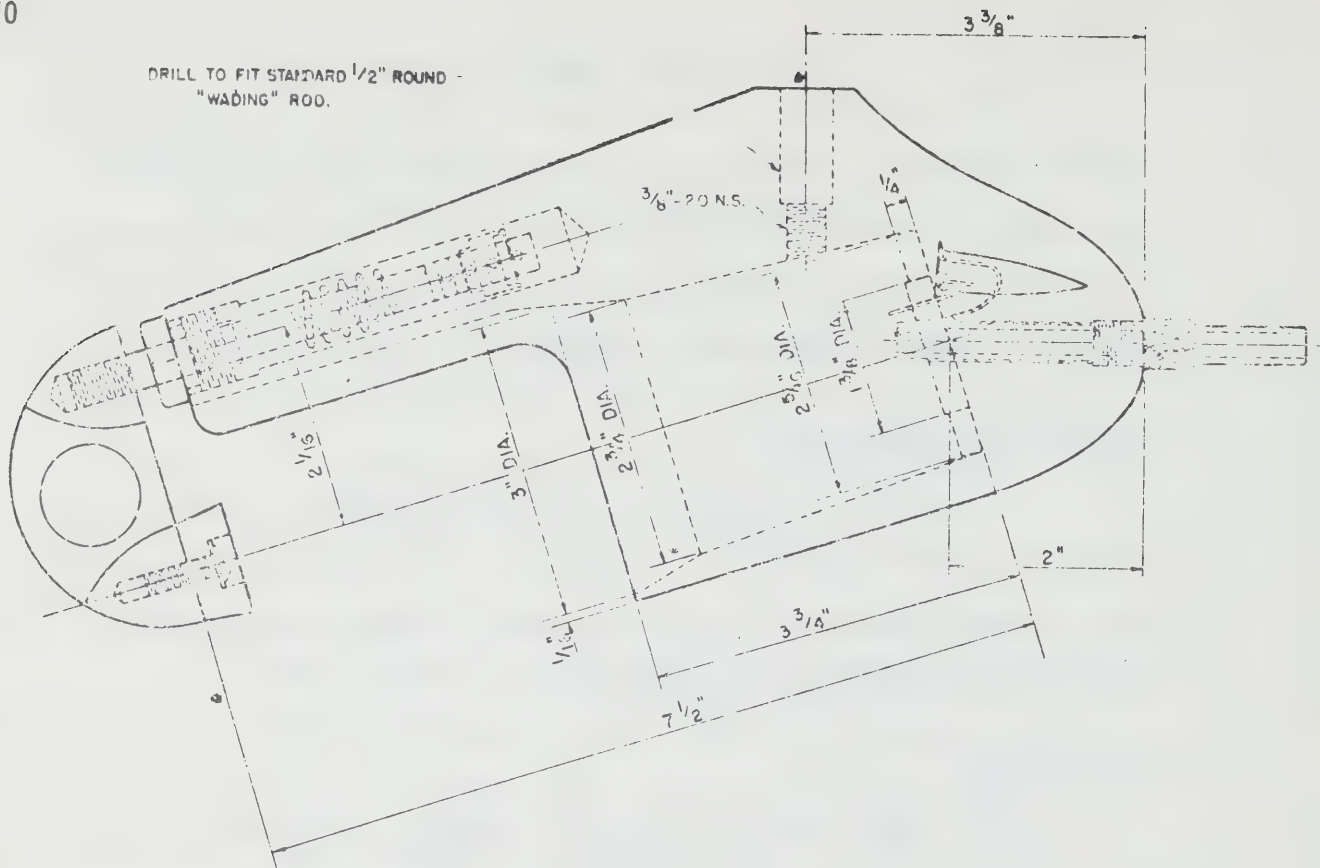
DEPTH-INTEGRATING WADING TYPE HAND SAMPLER, US DH-48
